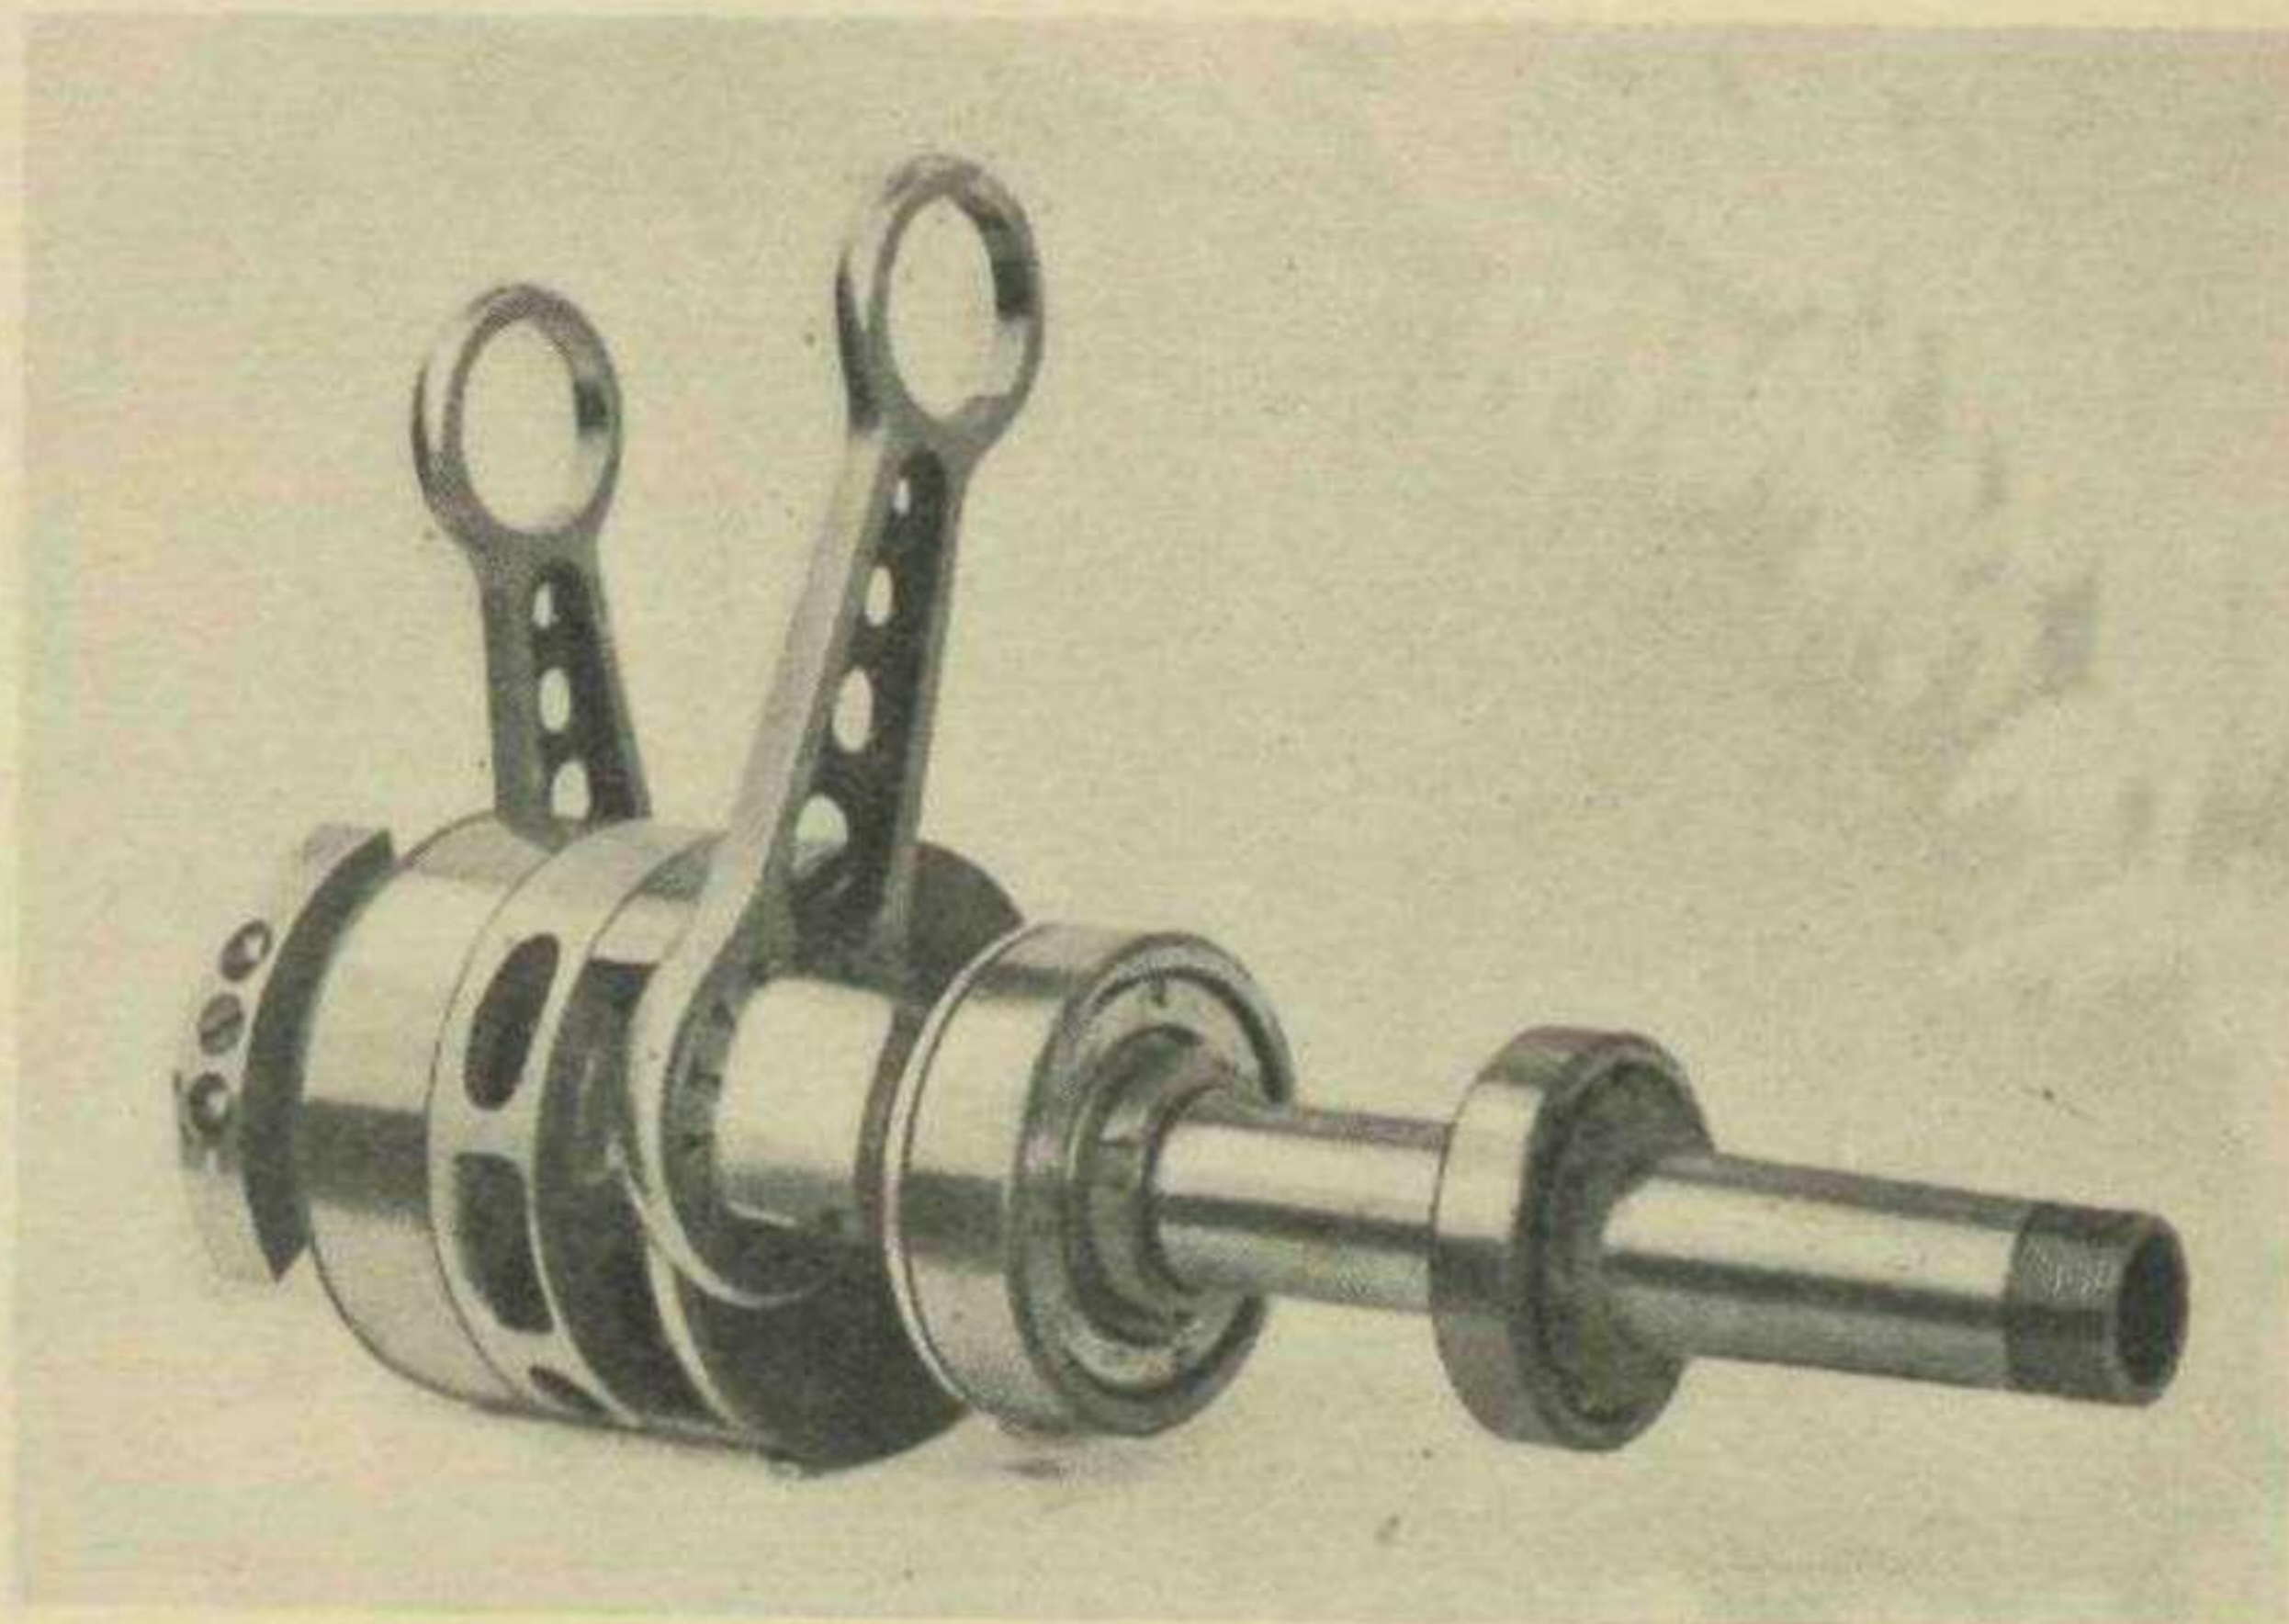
CRANKSHAFT ASSEMBLY FOR A LIGHT AERO ENGINE.
